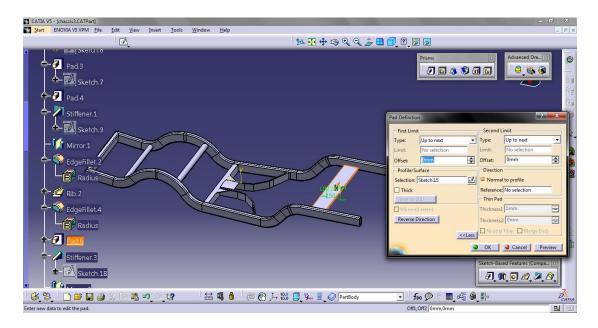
Used Pad Tool For The Side Rails In Chassis
